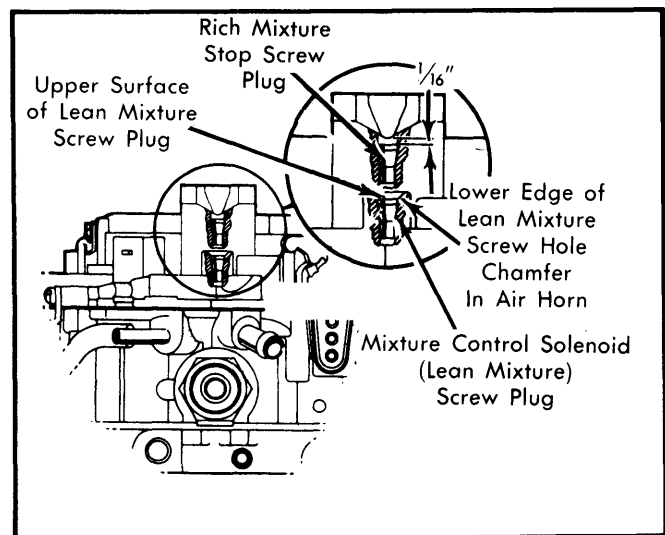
Installing Lean and Rich Mixture Stop Screws in Air Horn
